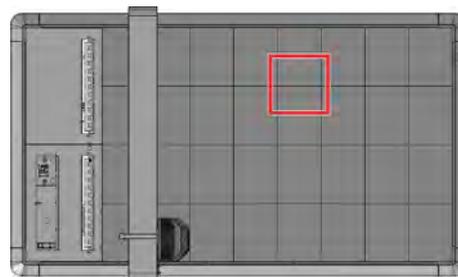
INSTALLATION LOCATION OF THE FILTER OF THE SPINDLE COOLING FAN (VIEW FROM ABOVE)
